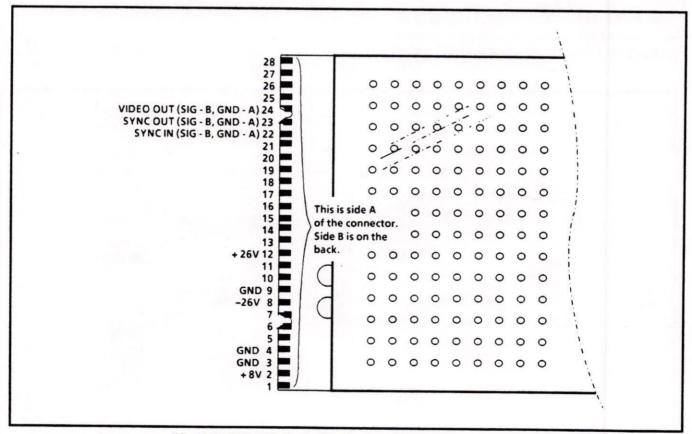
DP-100 Rear Card-edge Connector details.
